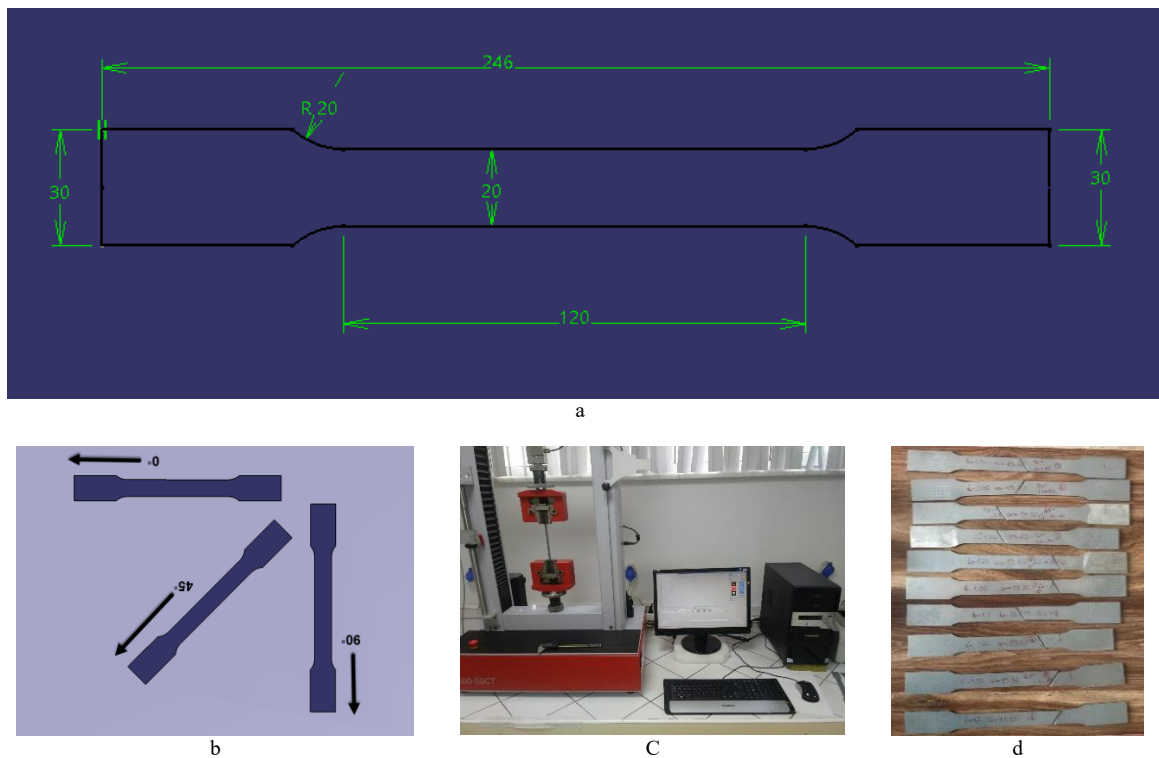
a. Tensile test specimen dimensions b. Tensile test specimen rolling directions c. tensile tester d. Samples after tensile test
